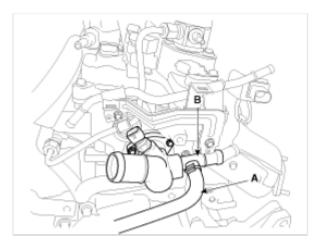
Identifying Injector & Rail Assembly Courtesy of HYUNDAI MOTOR AMERICA
